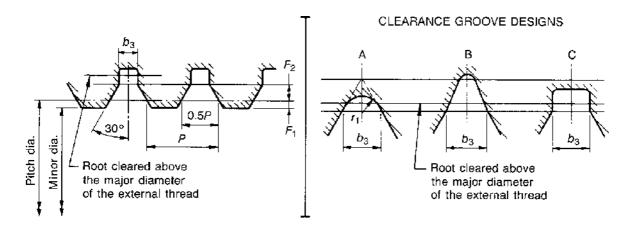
PROFILE FOR RING AND CALLIPER GAUGES WITH TRUNCATED FLANKS
